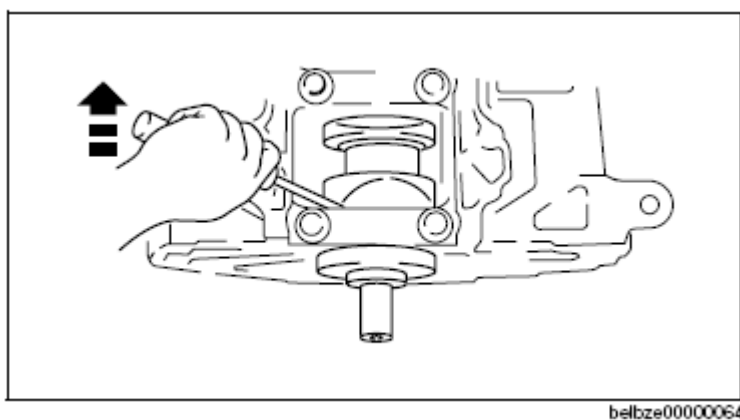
Inserting Flathead Screwdriver Into Crankshaft No.1 Counterweight Area
